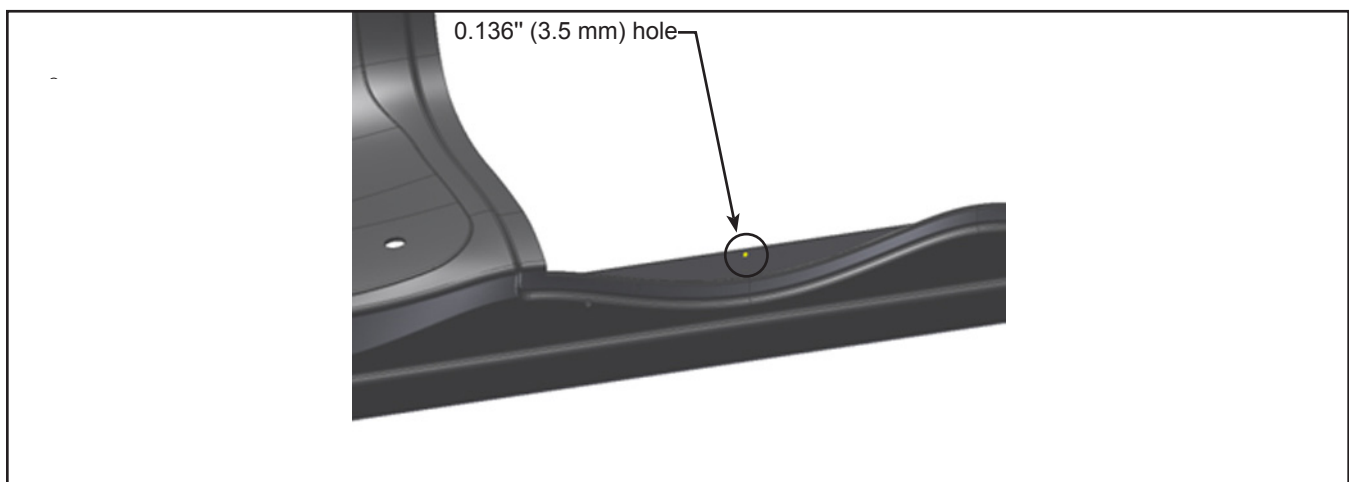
Drilled Hole in Steel Underframe (Curb Side Seat Shown / Street Side Similar)
